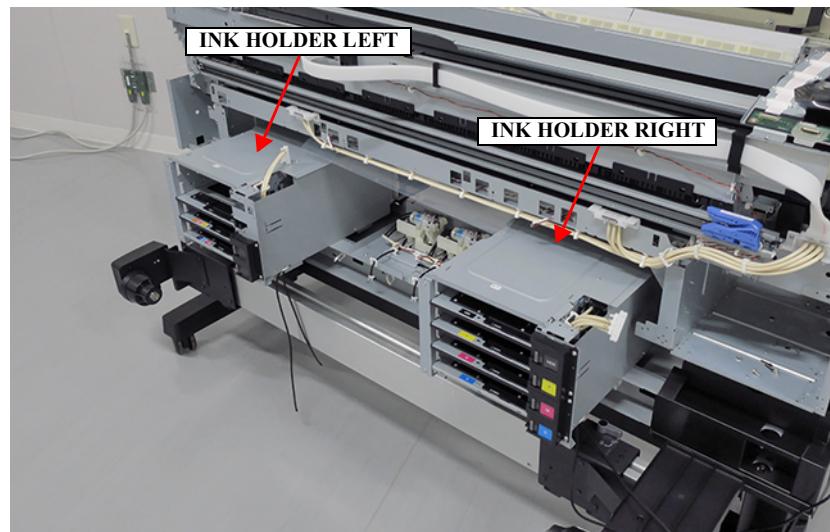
Removing the PF ROLLER MIDDLE SUPPORT (1)
